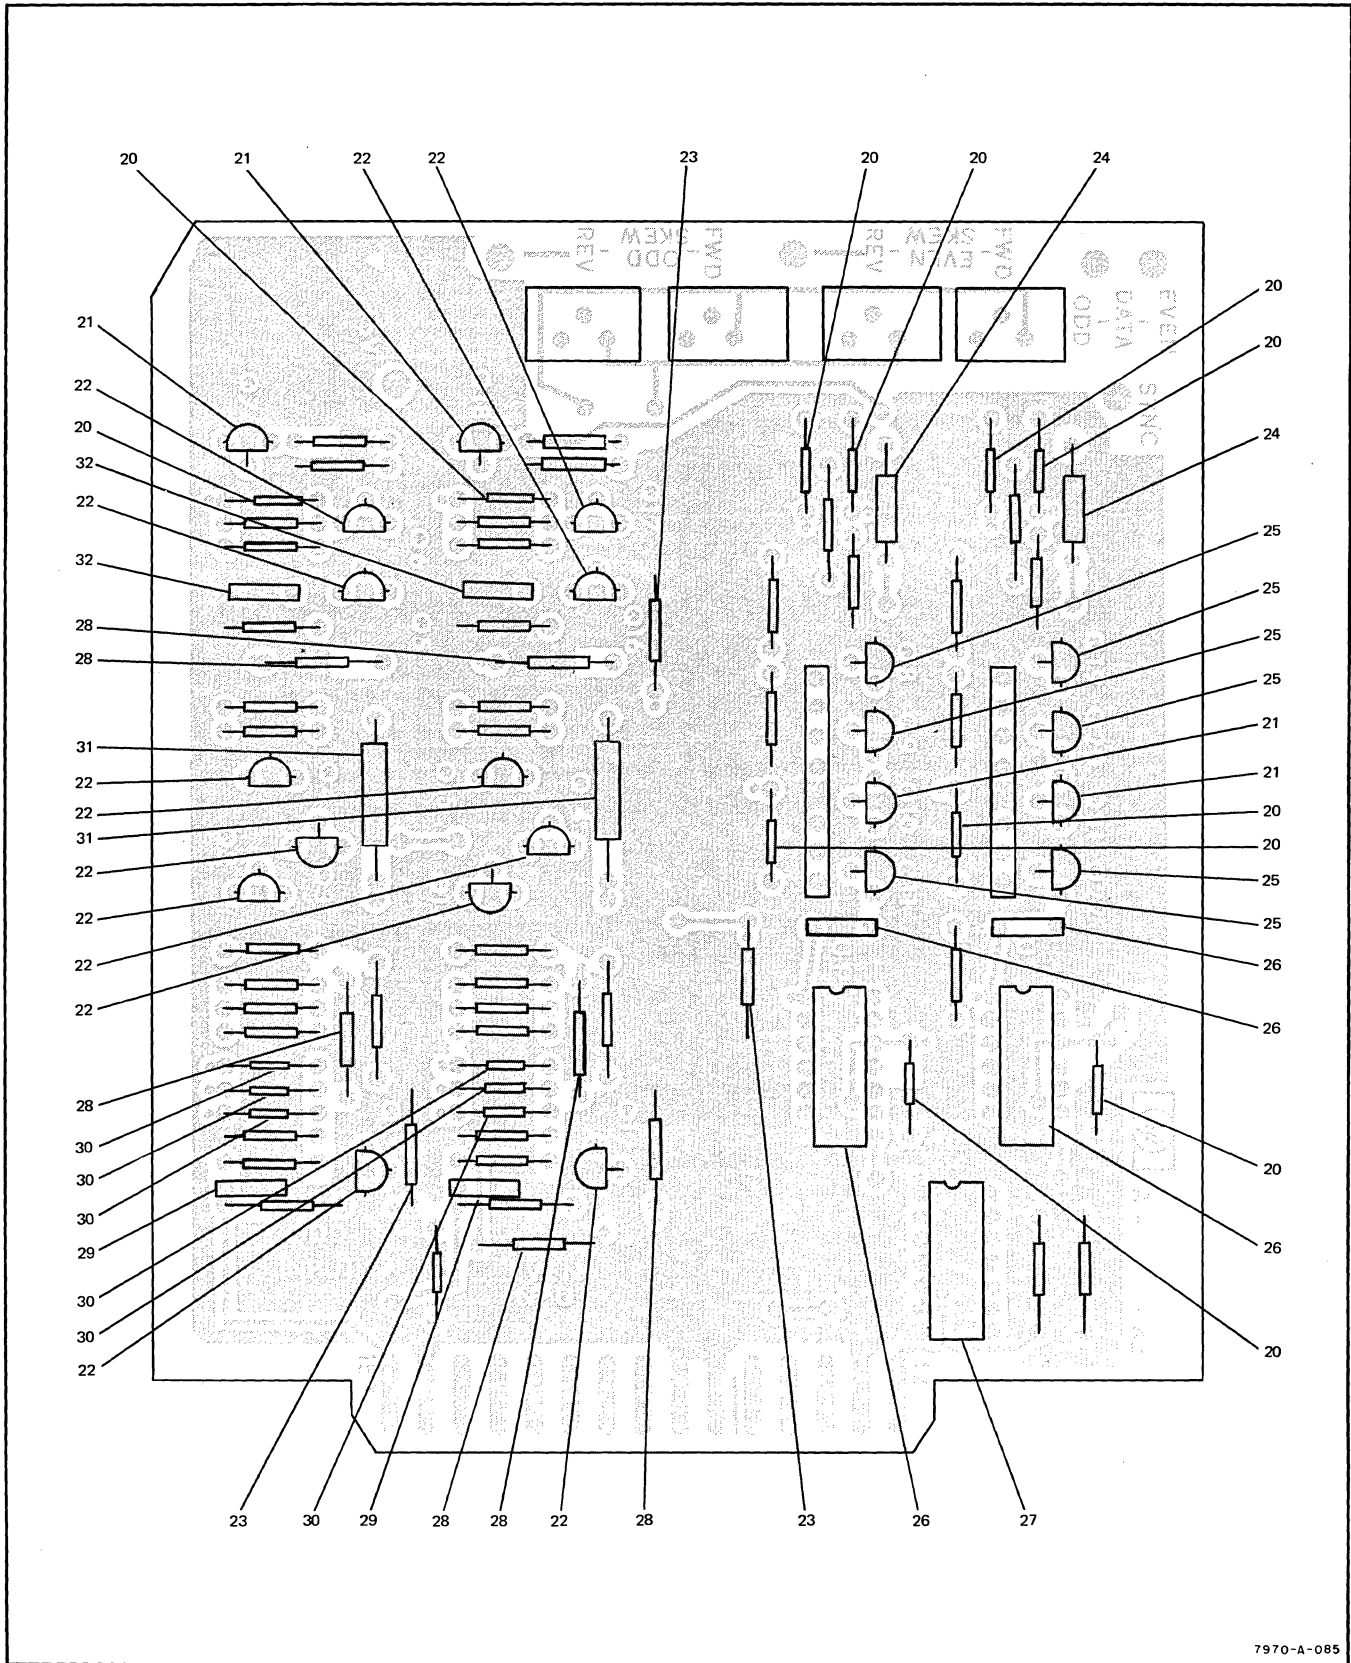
Dual-Channel Read Data PC Assembly (21 - 45 IPS) (Sheet 2 of 2)
